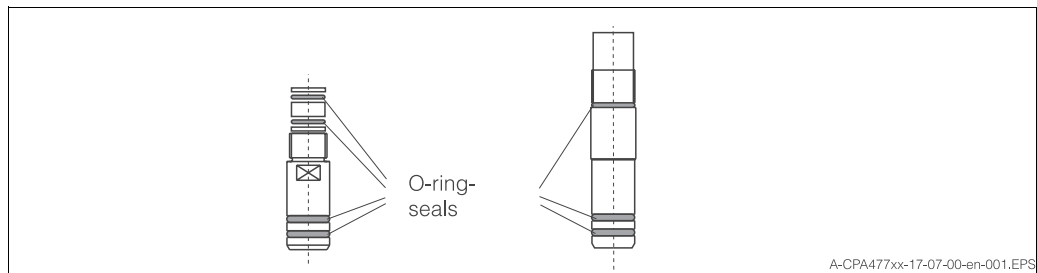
O-ring seals of the CPA 477 (in contact with medium)
